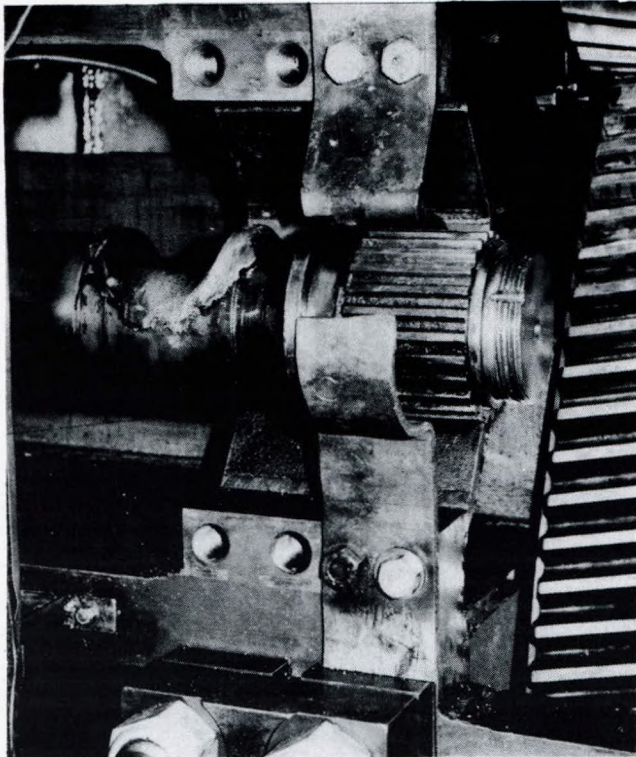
Jackshaft bearing journal of 'HMS Zulu'
